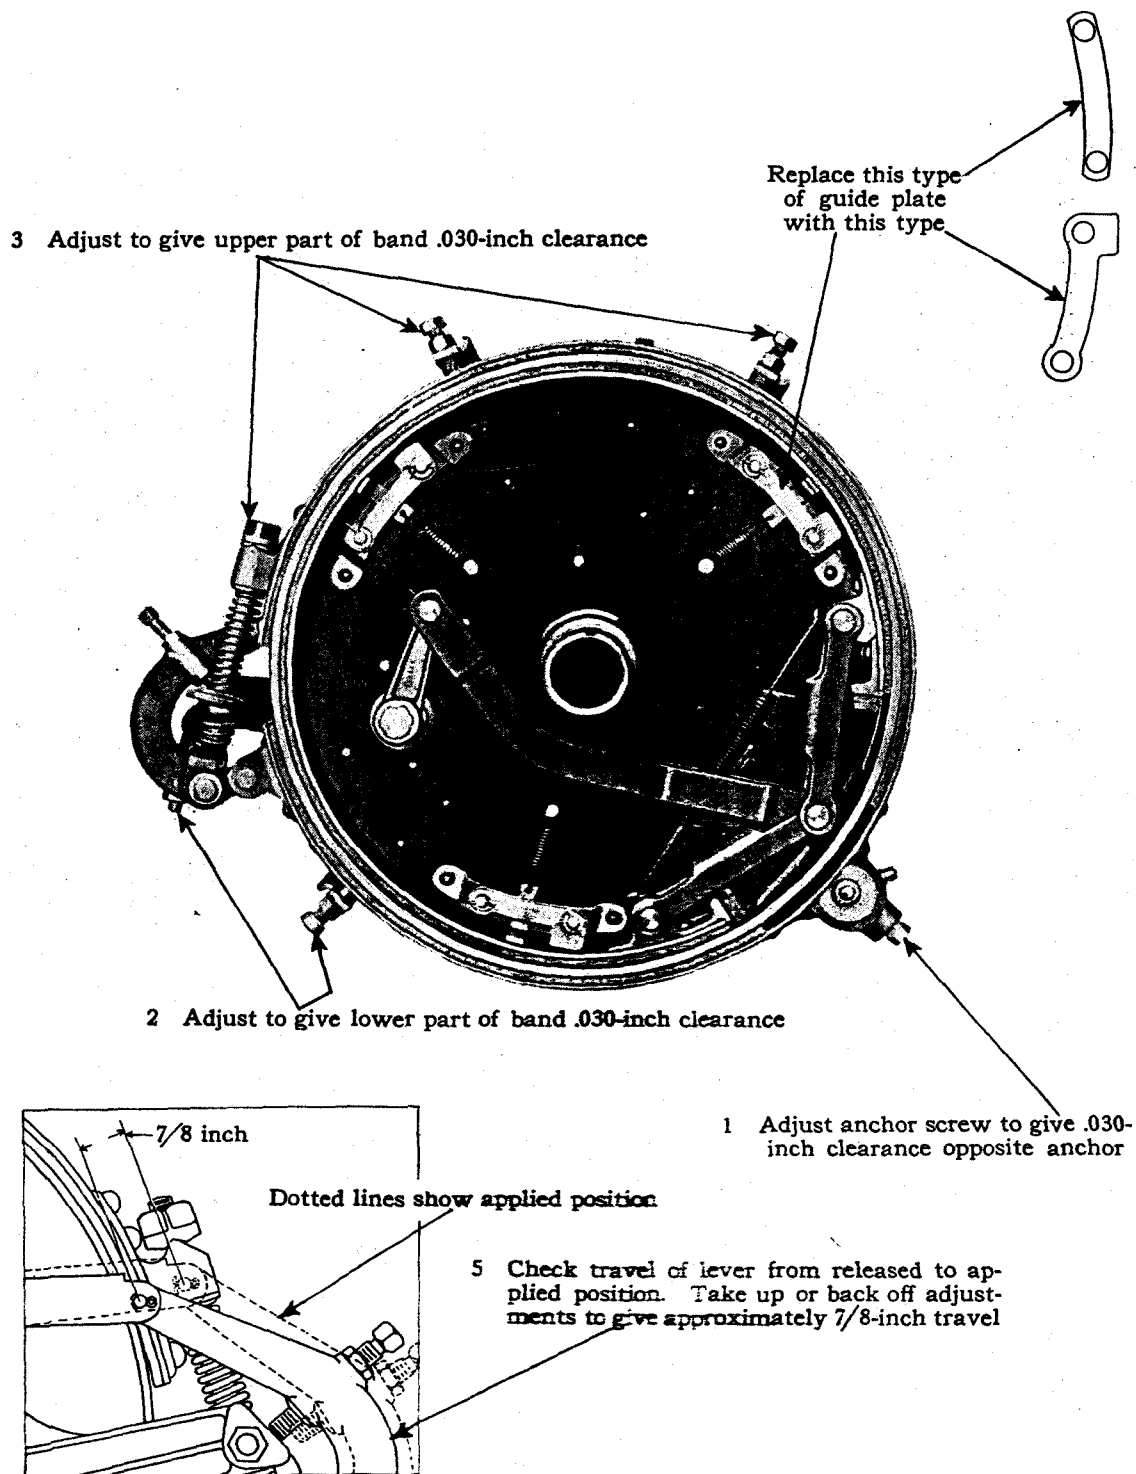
Adjustment of Cadillac 341-A rear foot brakes.
